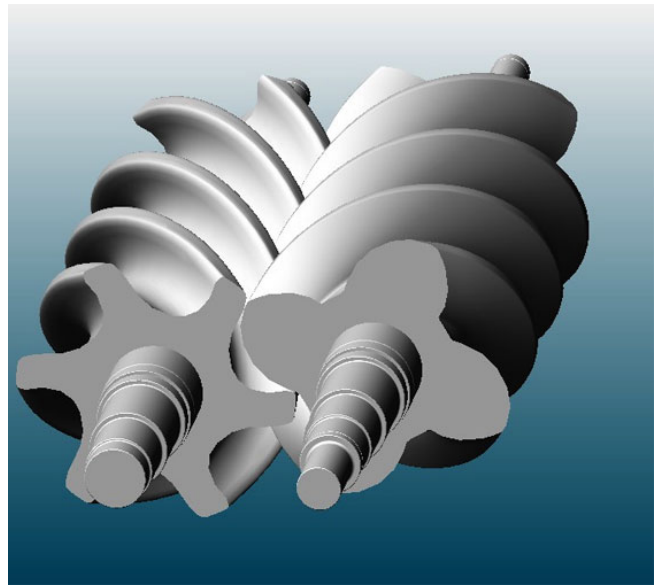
View of Typical Screw Compressor Rotor Pair
